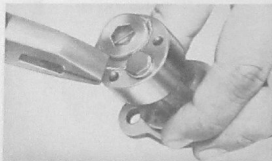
Installing and Safetying Check Valve Plug and Piston Plug Into Cylinder
